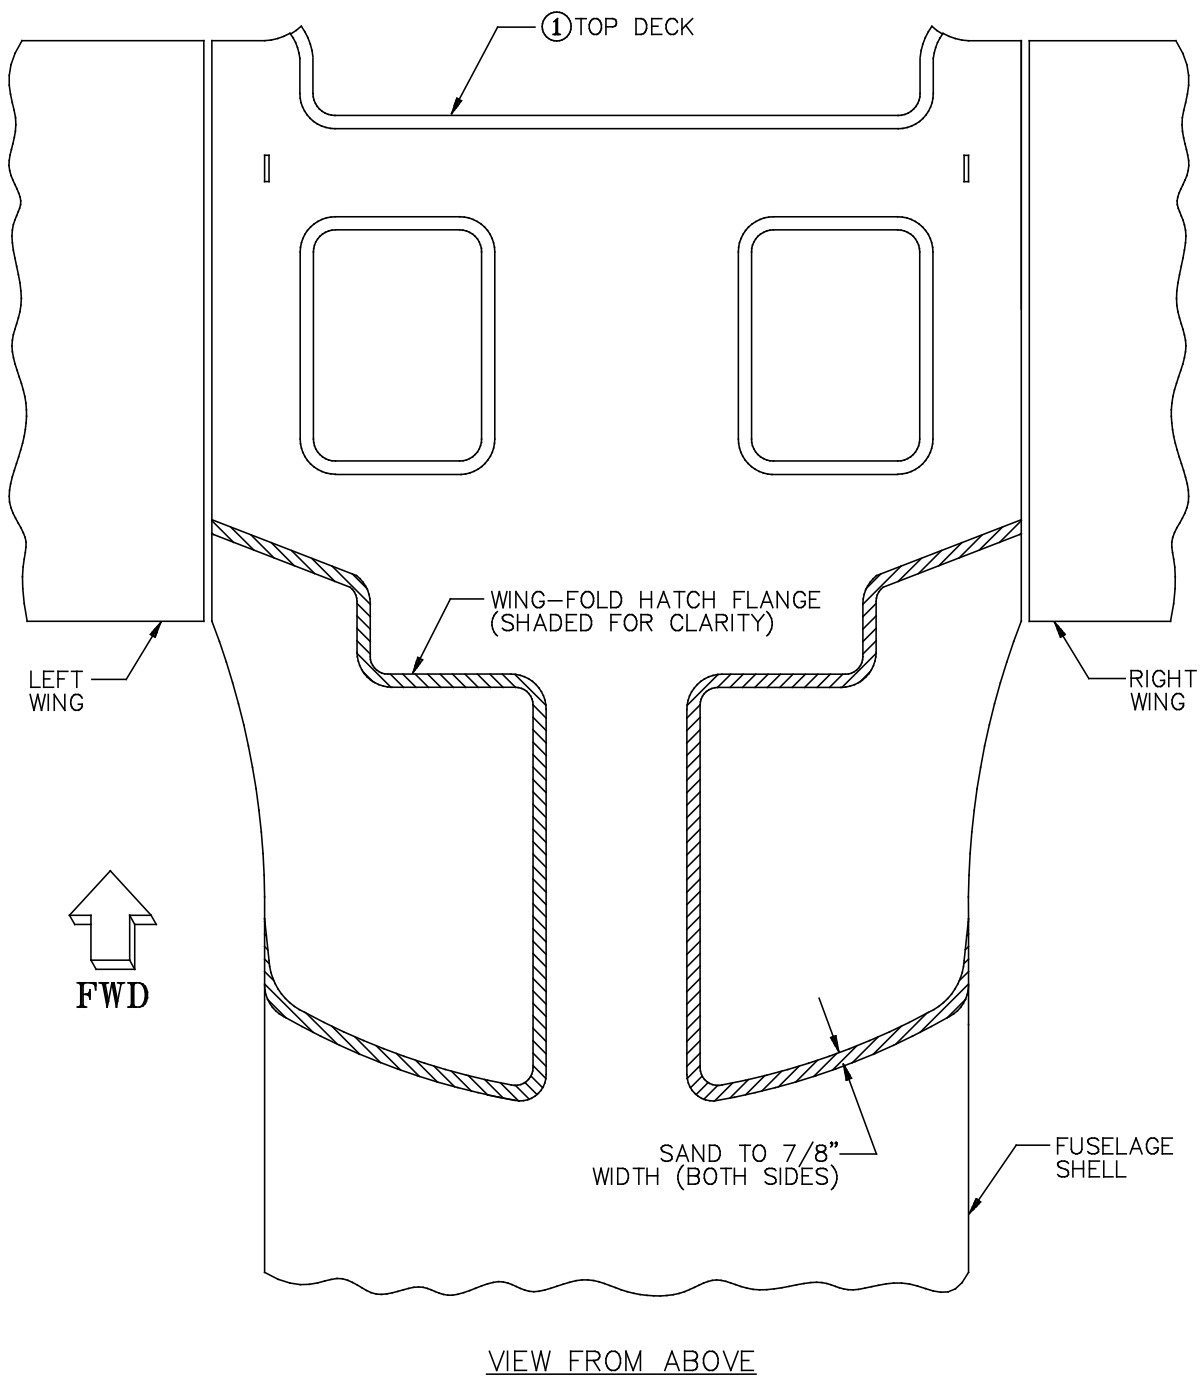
Trimming the Wing-Fold Hatch Mounting Flange
